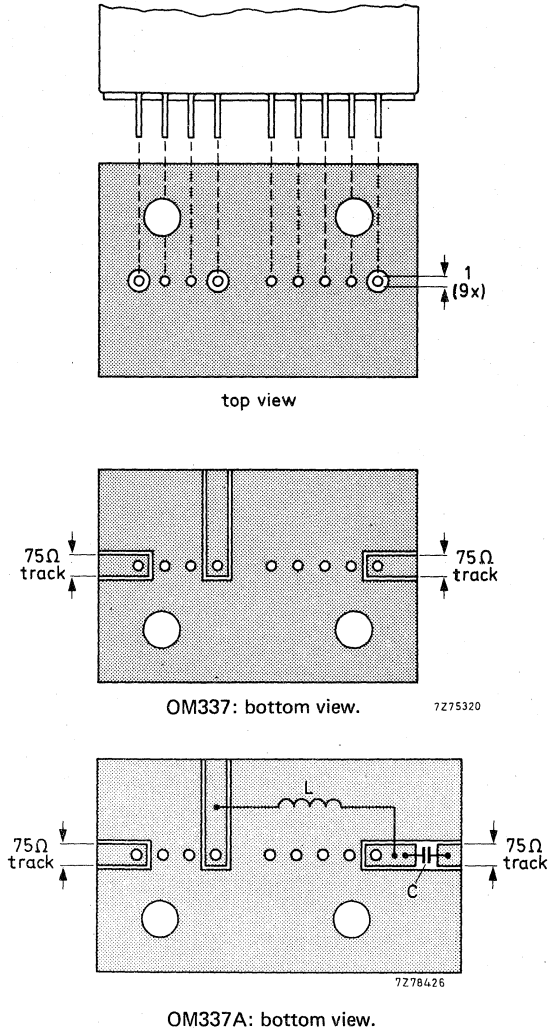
Printed-circuit board holes and tracks for the OM337 and OM337A.
